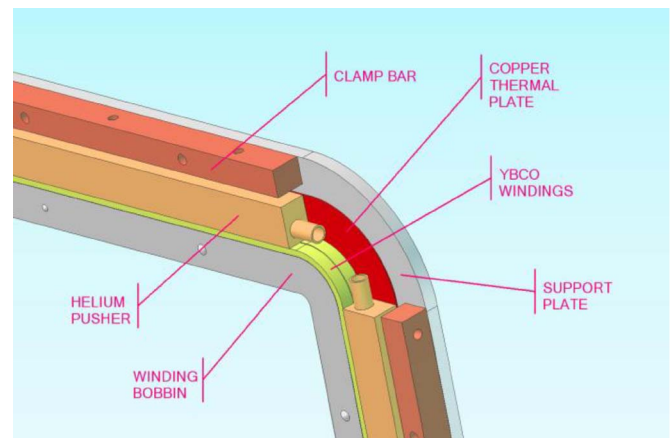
Open view of the double coil plus assembly structure with parts marked. Support plate on near side is removed to make inner parts visible.
